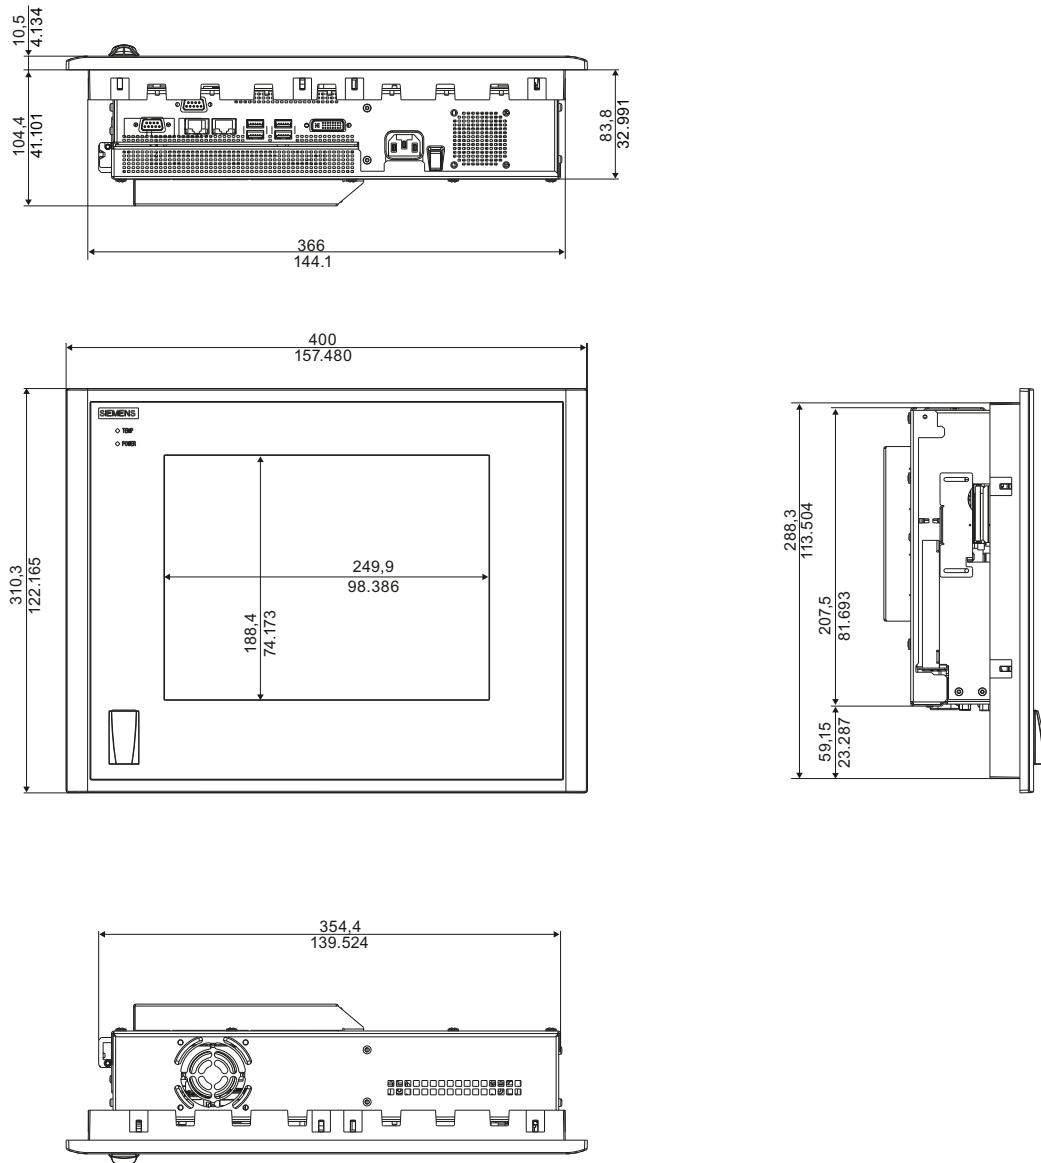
Dimension drawing of the touch screen device with 12" display
